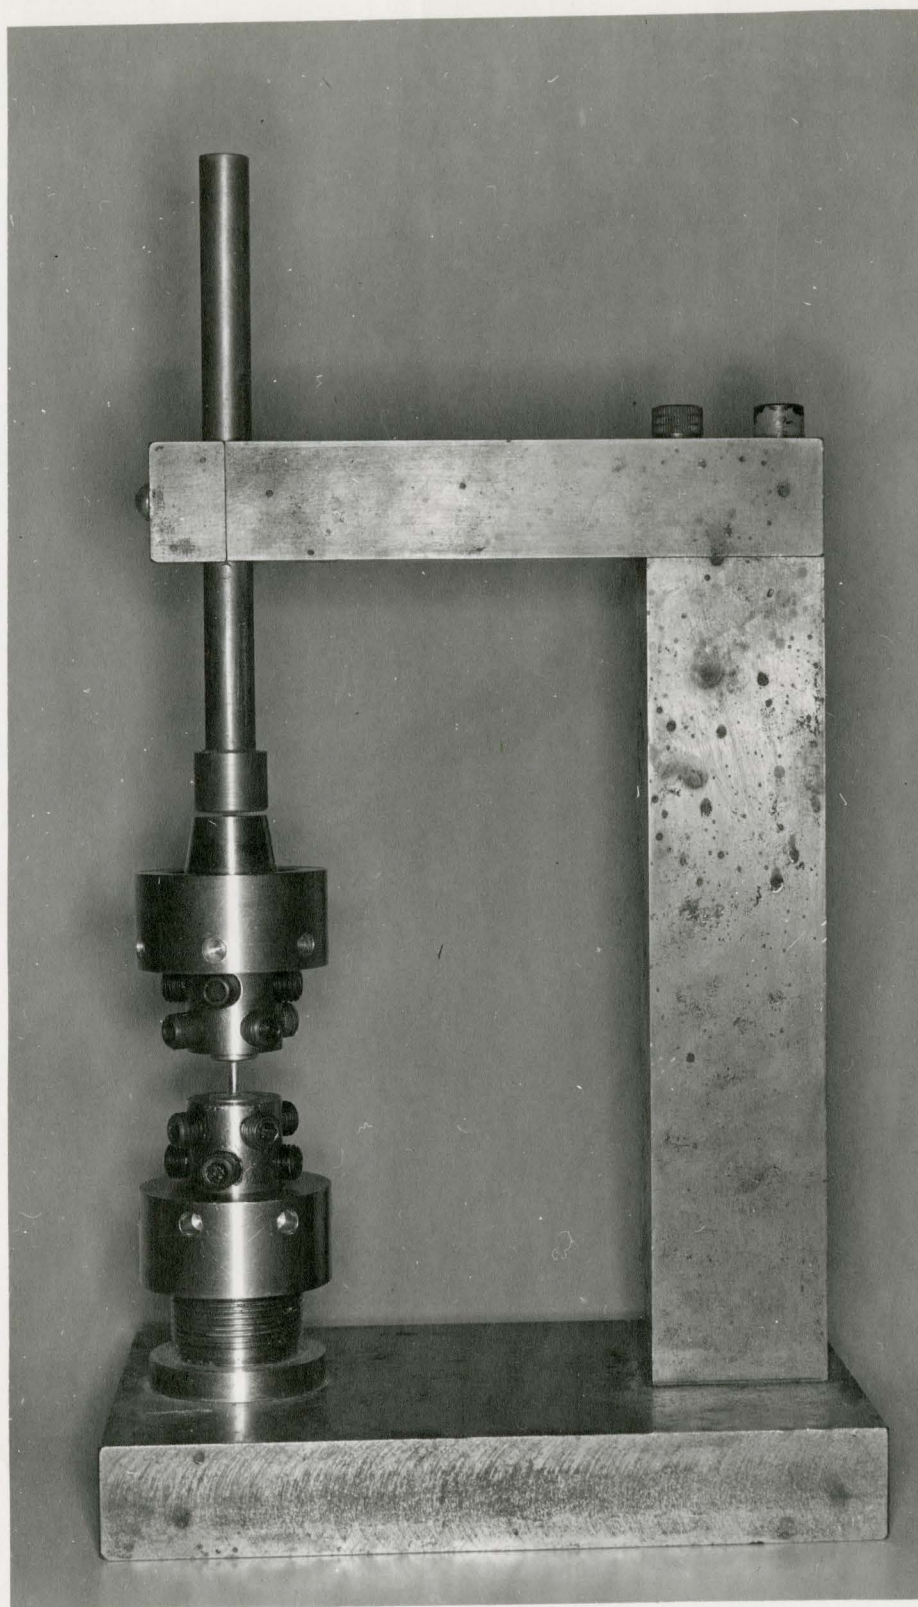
Alignment jig used for specimen alignment before fatigue.
